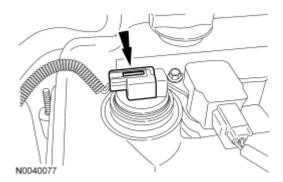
Locating Cylinder Head Temperature (CHT) Sensor Electrical Connector And Boot Courtesy of FORD MOTOR CO.
